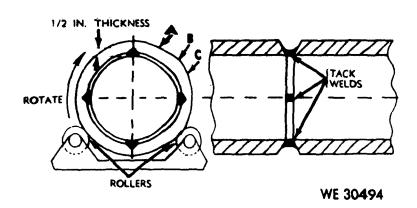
Diagram of tack weld pipe on rollers.
